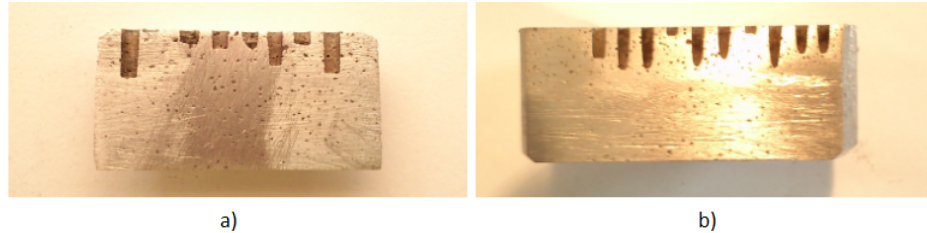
Final aspect of workpieces, after the preparation for measurements on microscope:
